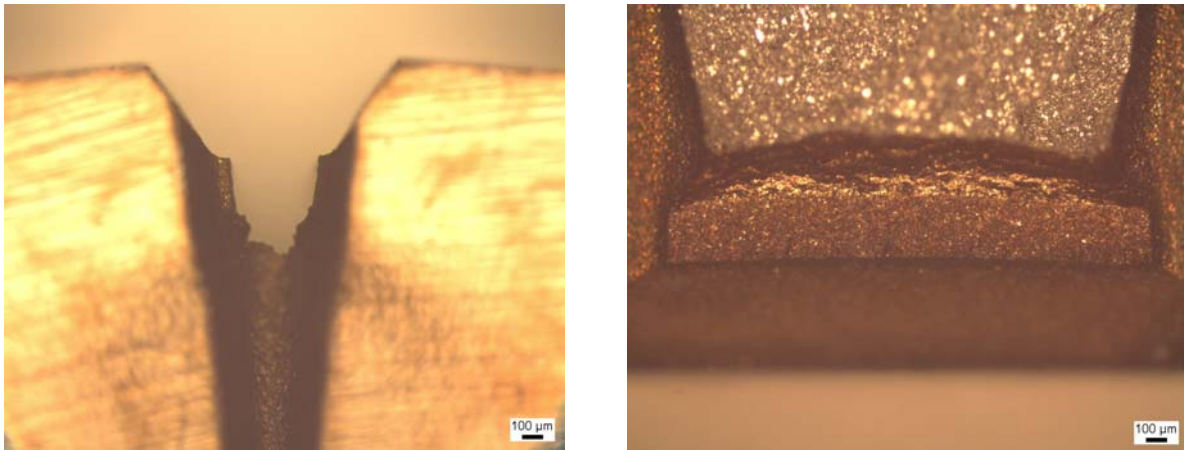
(left) Side view of side grooved mini-bar EUROFER 97 specimen (EF56); Starter notch type "V"; $a_0/W \approx 0.2$; (right) Fracture surface of side grooved mini-bar EUROFER 97 specimen (EF56).
